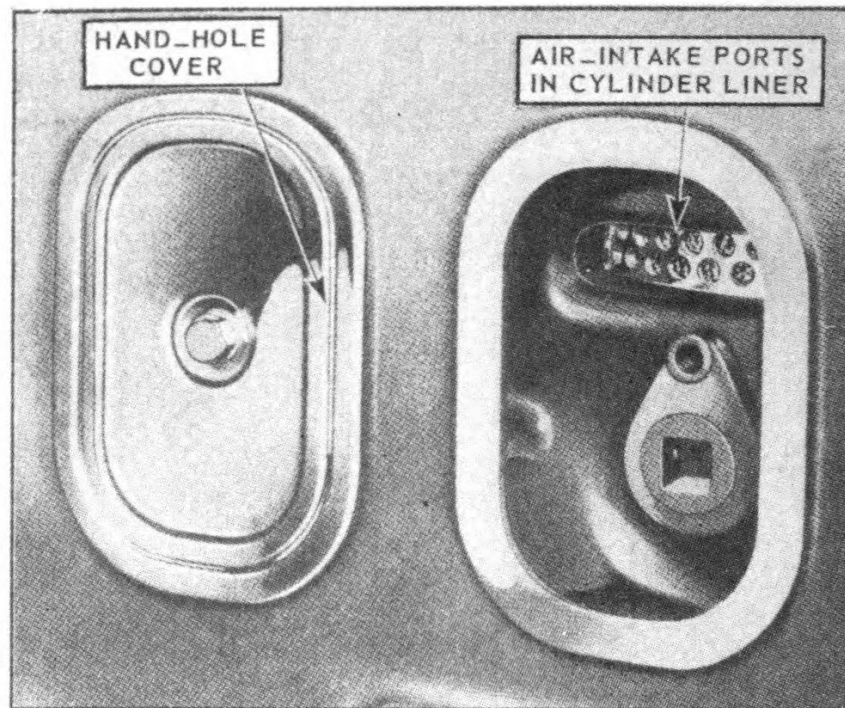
Cylinder block hand-hole cover (GM 6-71).
